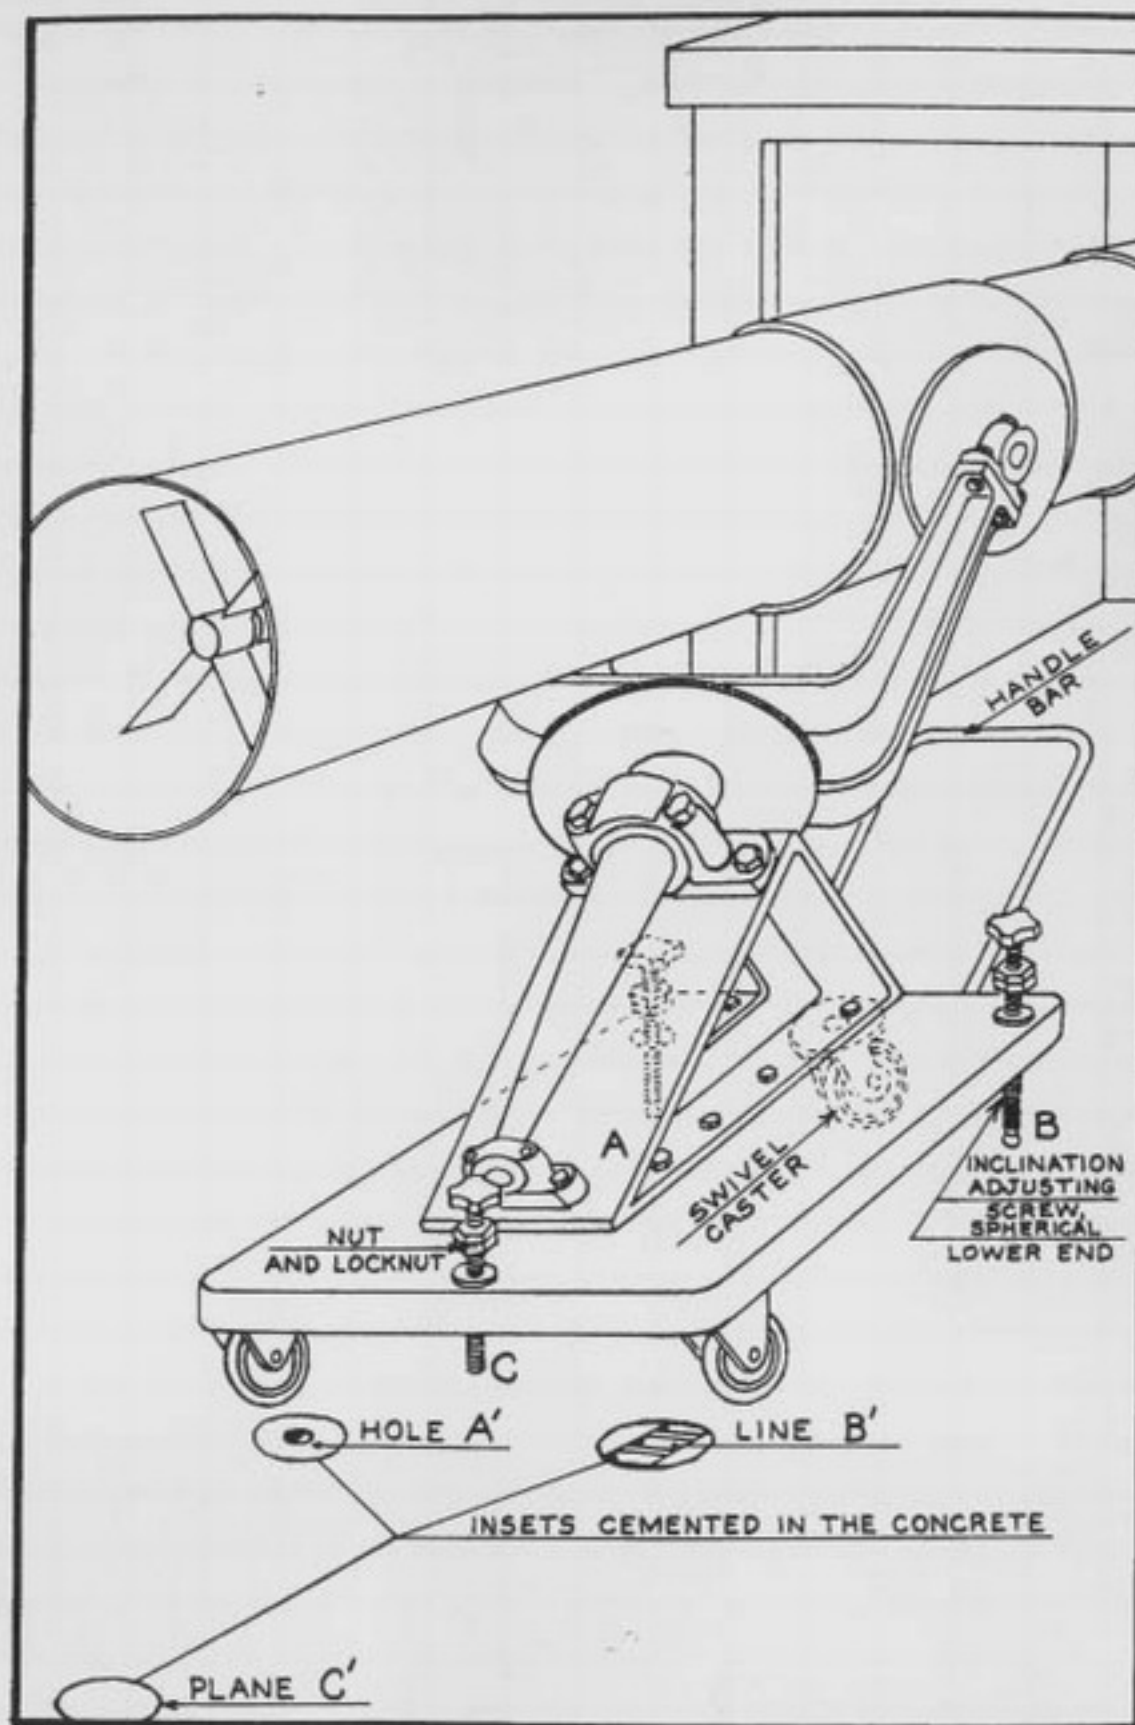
Mobile equatorial adapted for positioning on inserts defining hole, line and plane.
